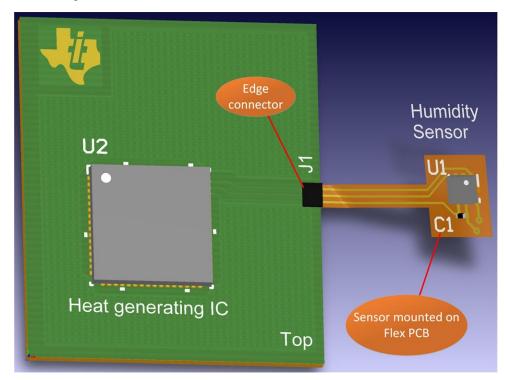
Dedicated Sensor Flex PCB with Edge Connector
